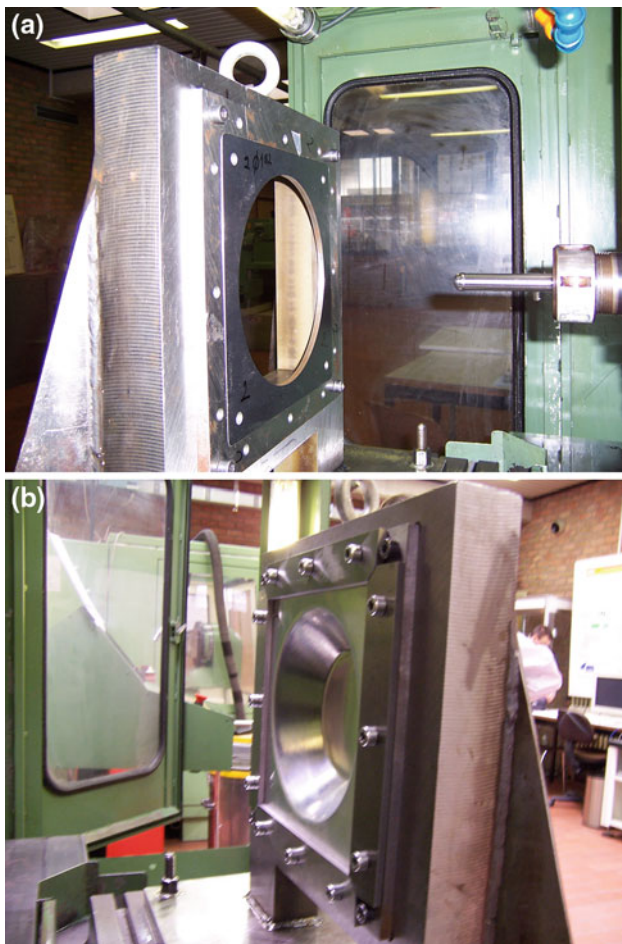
Experimental SPIF device (picture courtesy of Johan VERBERT, KUL). a Close-up view of backing plate and tool. b Side view of the complete clamping system
